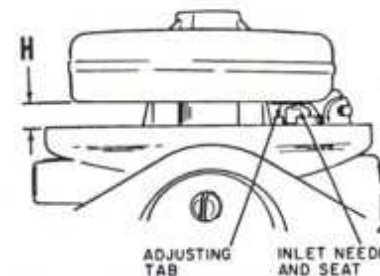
Float height (H) should be measured as shown on Walbro float carburetors. Bend adjusting tab to adjust height.
